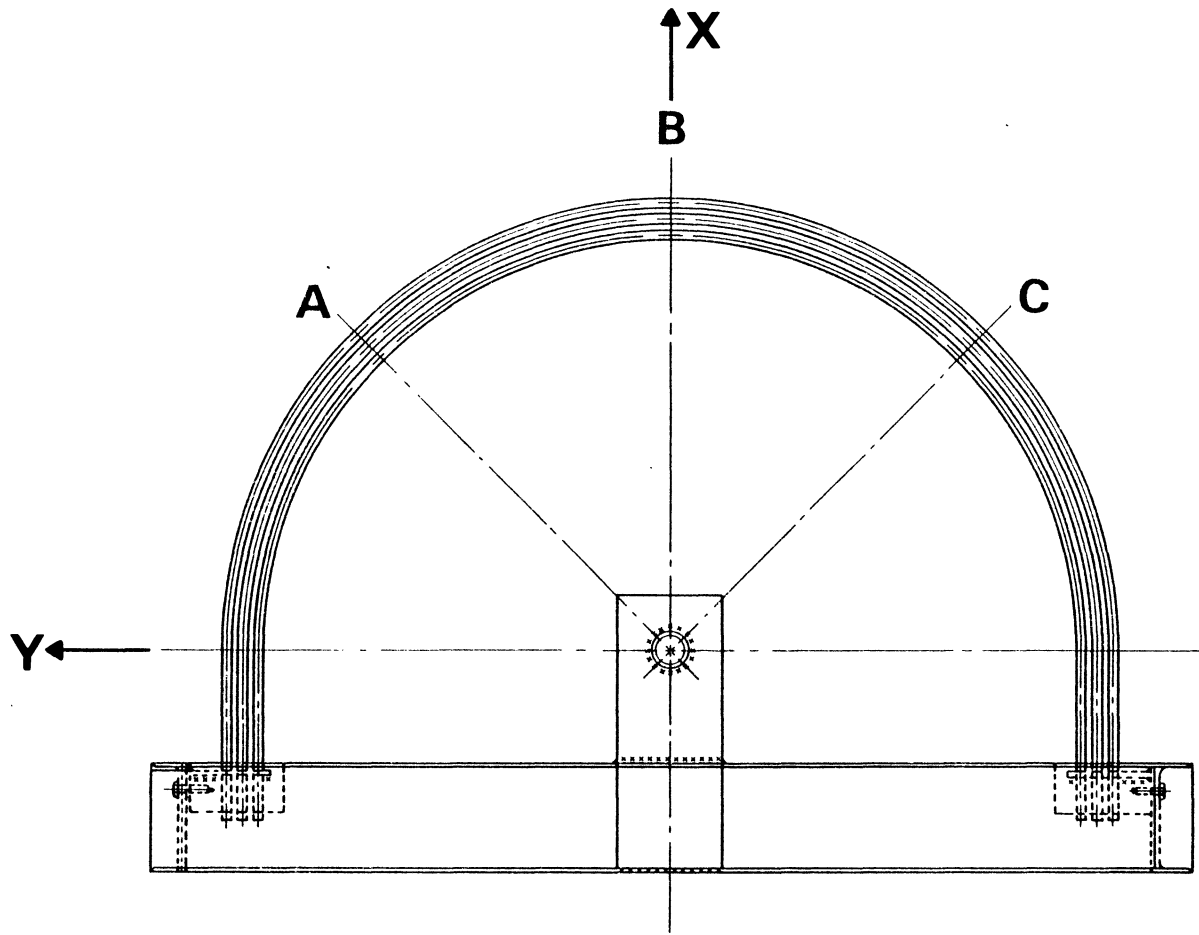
Heat exchanger U-tube assembly (adapted from [2]).
